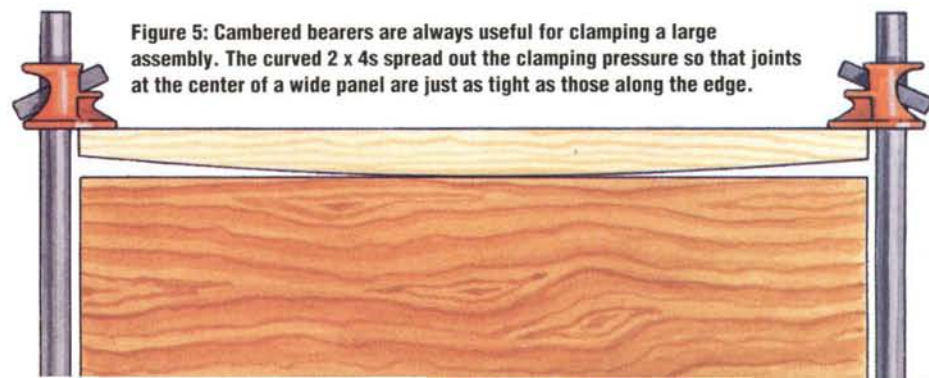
Cambered bearers are always useful for clamping a large assembly. The curved 2 x 4s spread out the clamping pressure so that joints at the center of a wide panel are just as tight as those along the edge.
